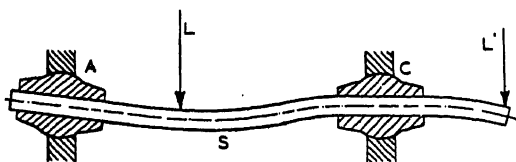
Effect of Shaft Deflection on Self-aligning Bearings.
